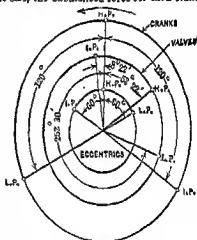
Arrangement of cranks and eccentrics—looking aft.
